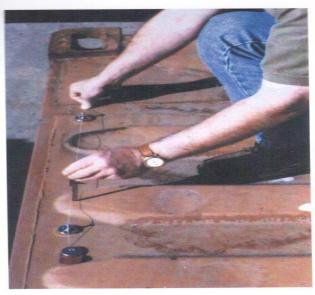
/Measuring damage to standing corrugation at roof ends, when end of last corrugation is damaged. See Section 4.6.4.
